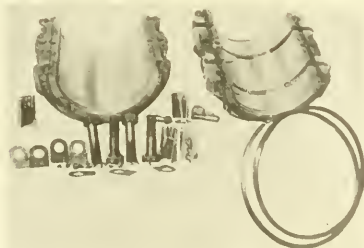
MAIN MOTOR BEARING SHELL AND DETAILS
